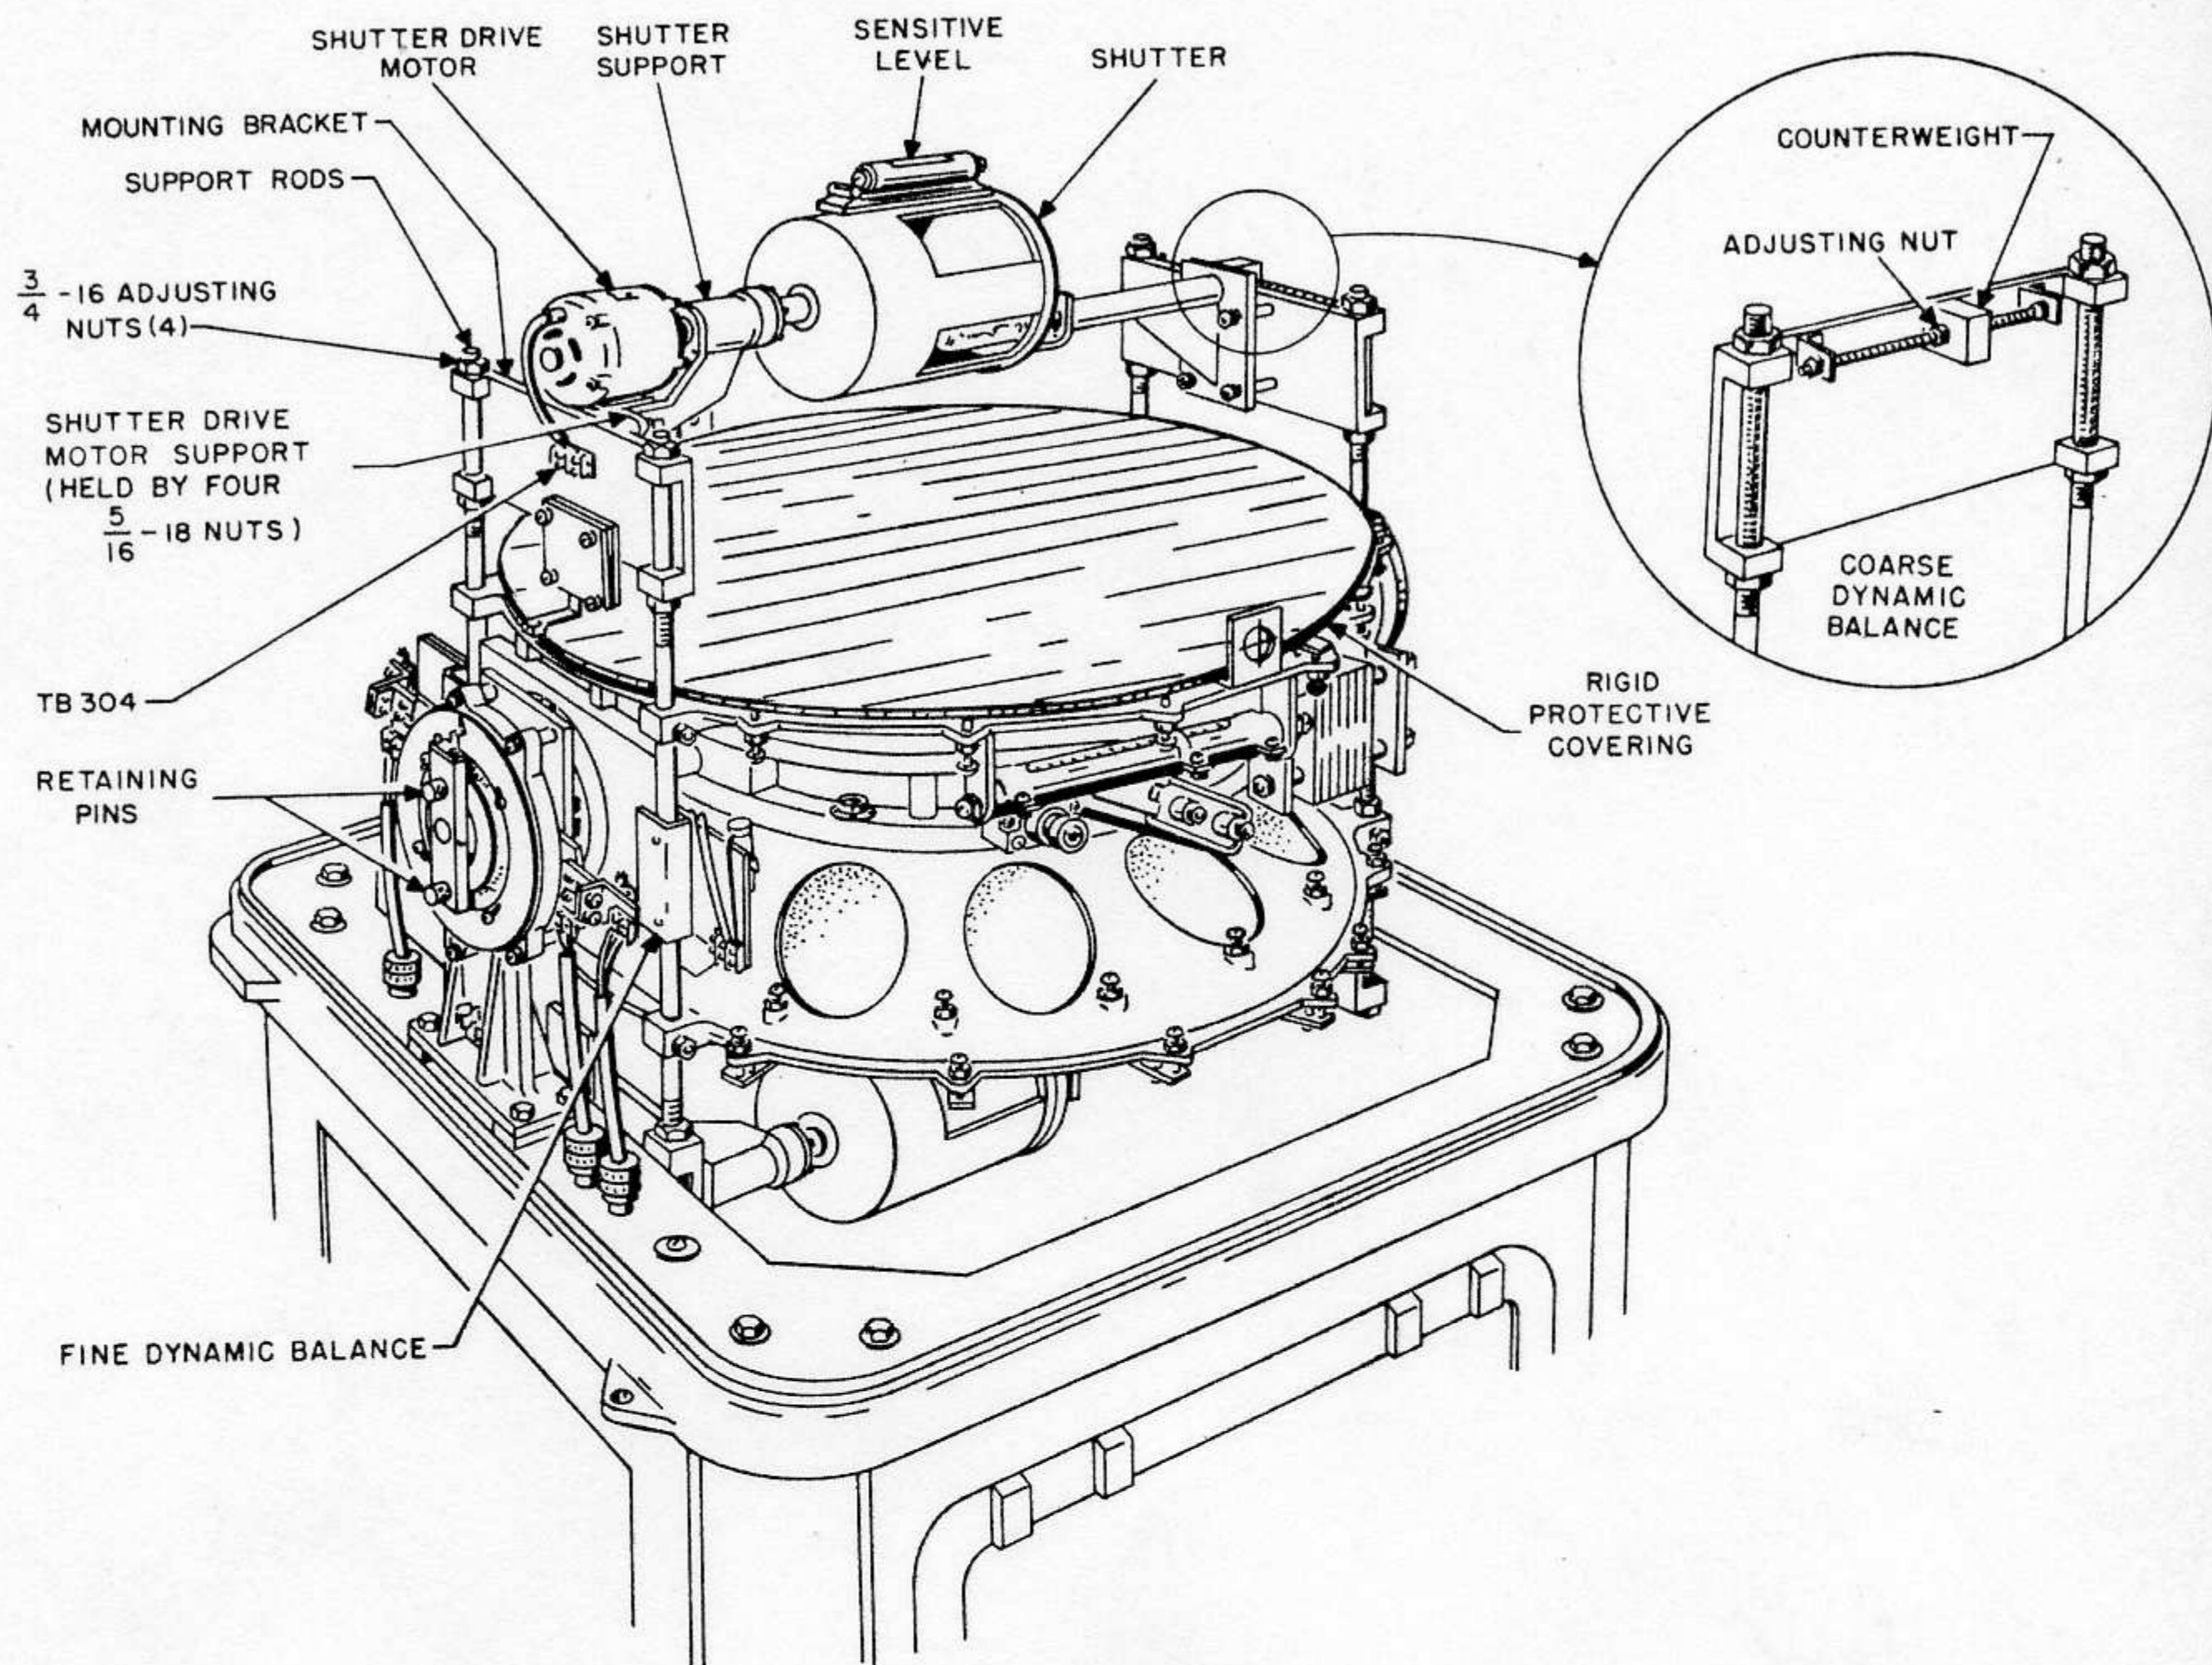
Projector Shutter and Rotary Mount Dynamic Balance
